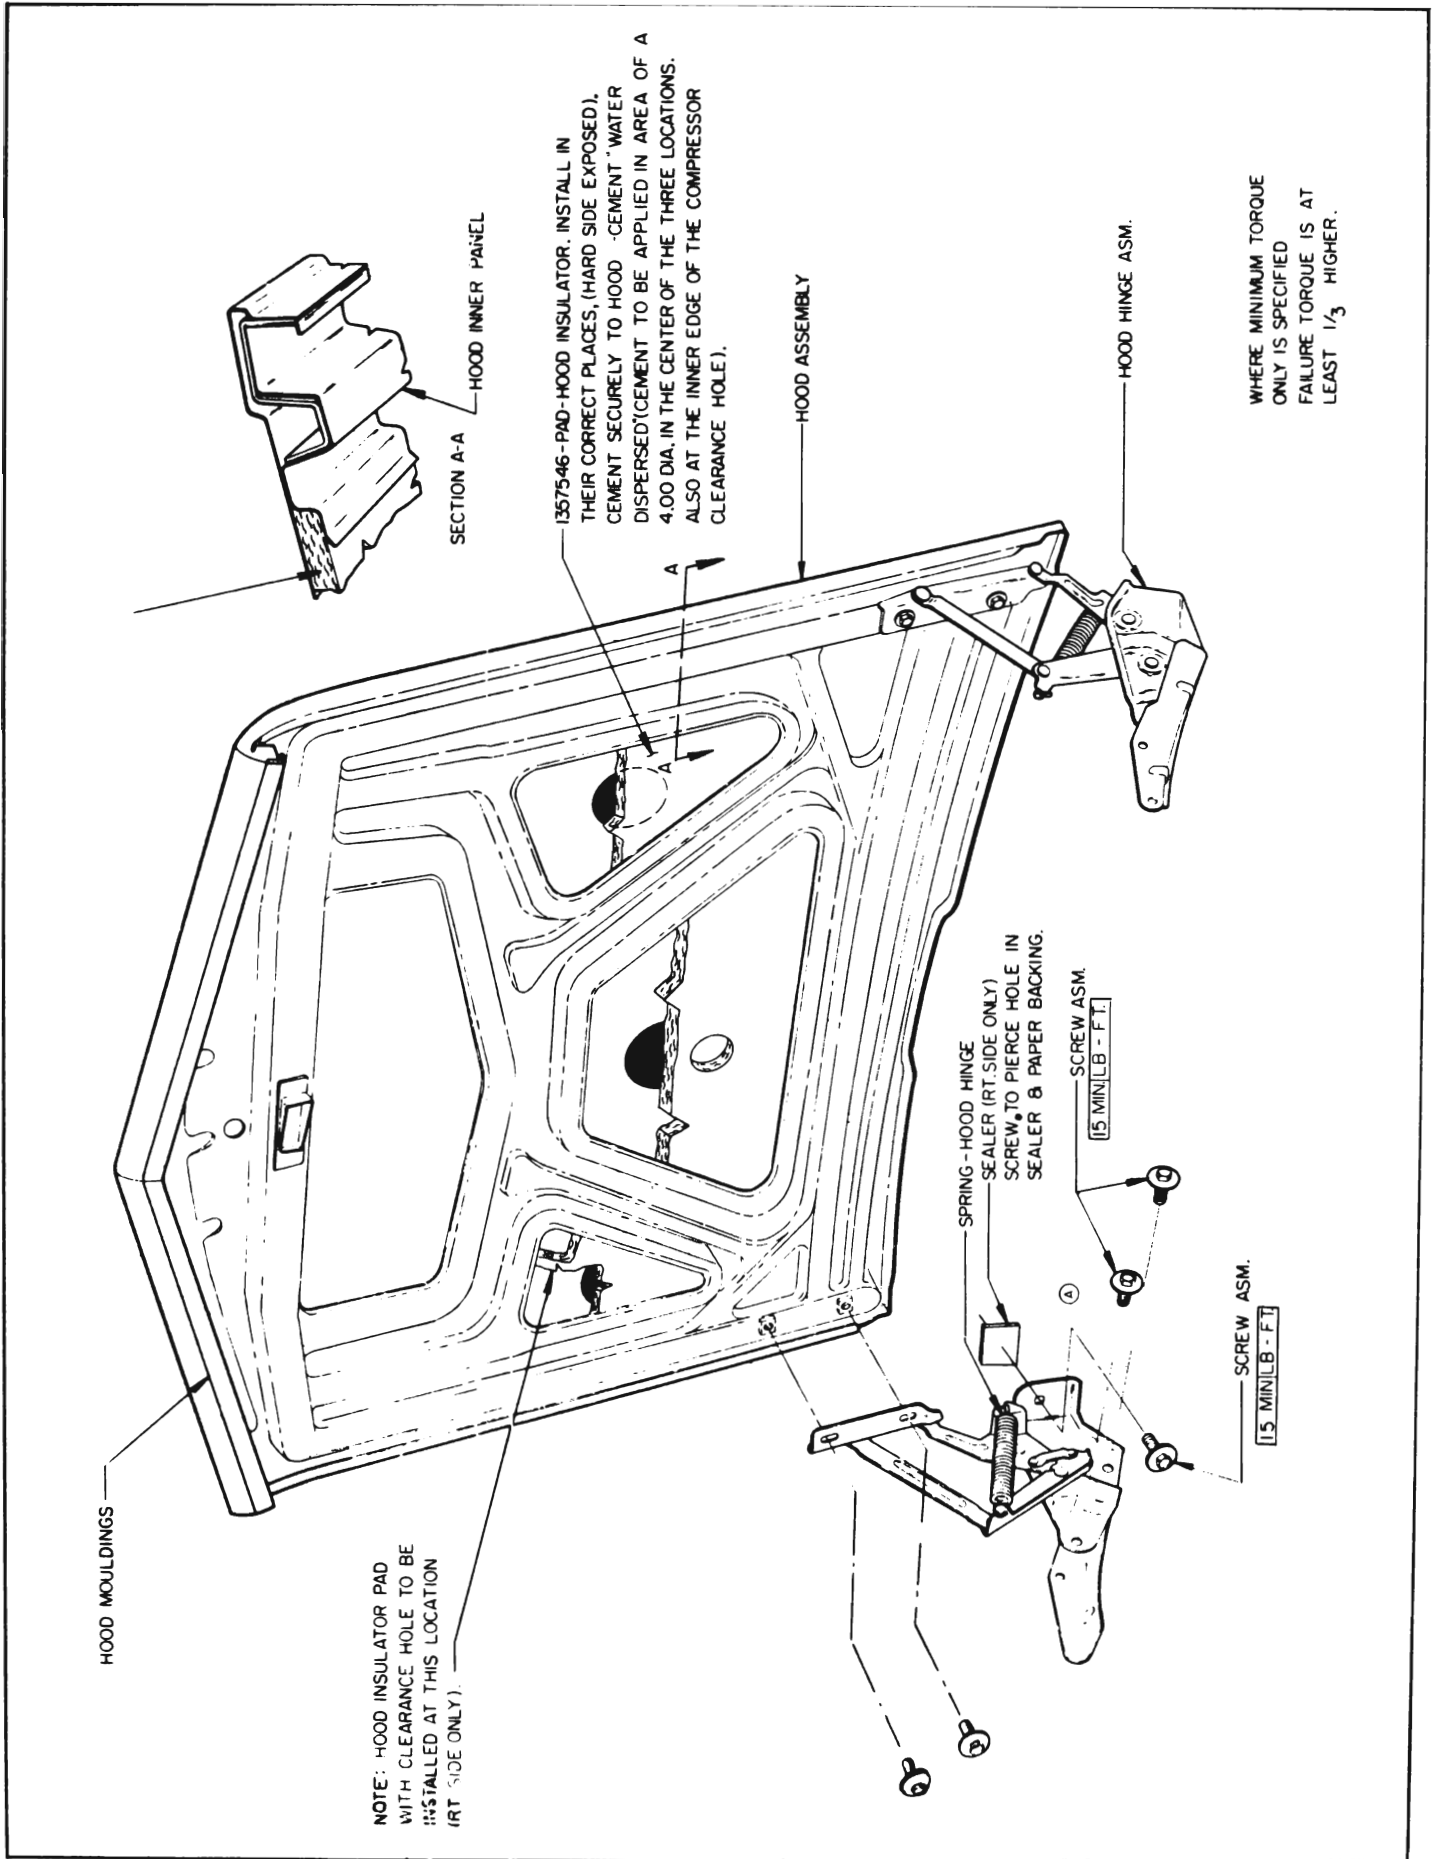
Hood & Hood Hinge Assembly - 49 Series
